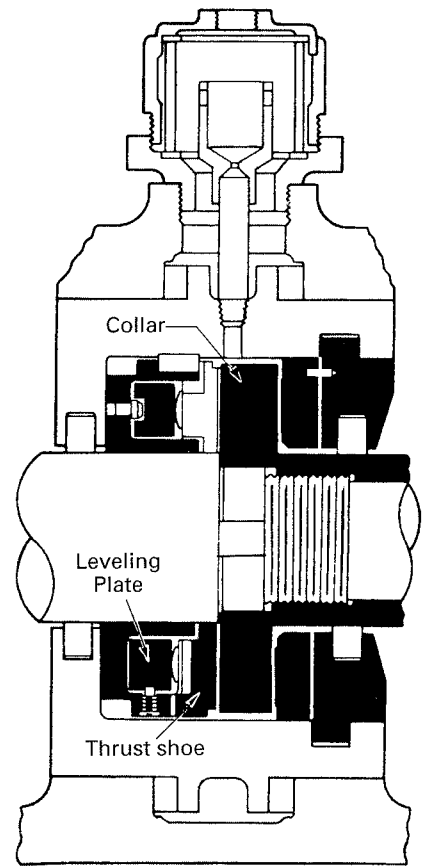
In a Kingsbury-type thrust bearing, the tilting shoes form oil wedges.
